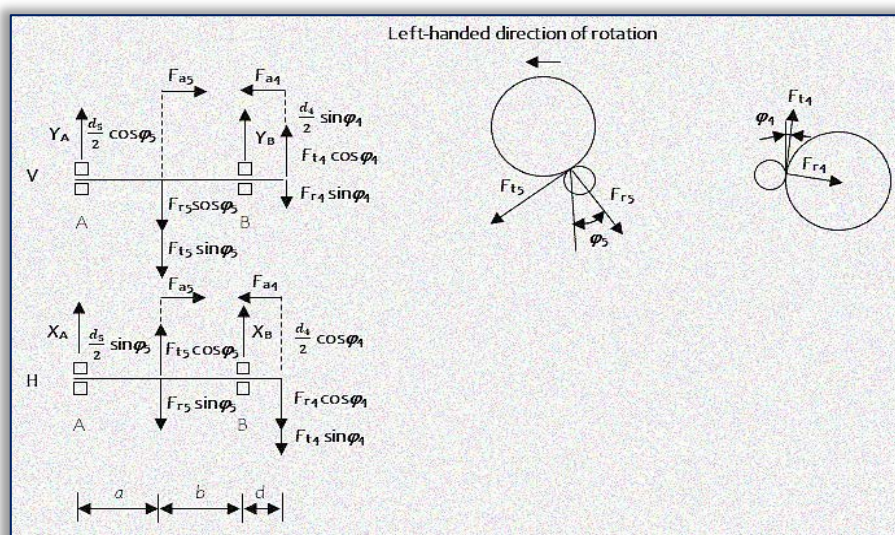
Analysis of forces on the fifth gear shaft for a three-stage gearbox in case the axial forces are overridden, i.e. there are two sets of output gears (left-handed direction of rotation of the output shaft)
